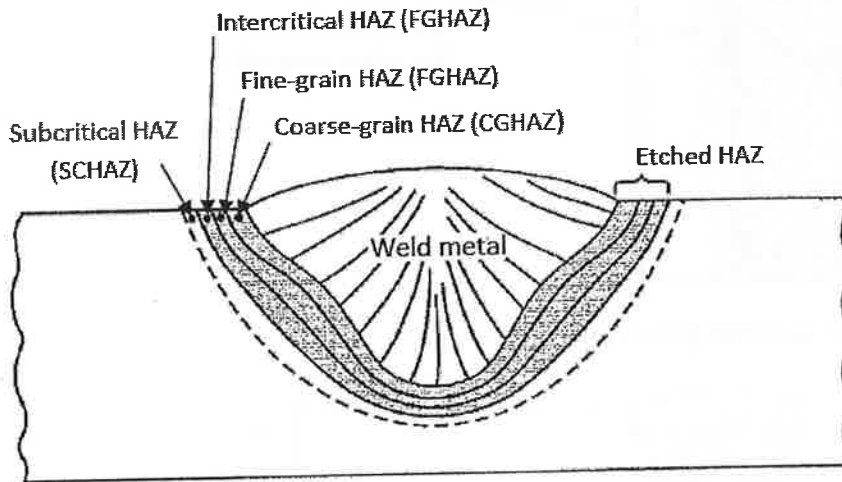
Various regions of a Single-pass, bead-on-plate weld (*API RP-2Z*)
